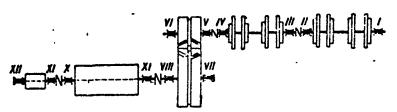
Arrangement of bearings of the KTK-7 turbocompressor: I, III) radial damping bearings; II, IV) radial support bearings; V, VI) radial bearings of high-speed gear; VII) radial bearing of low-speed gear of reducer; VIII) radial support bearing of low-speed gear; IX, X) bearings of electric motor; XI, XII) bearings of exciter.
